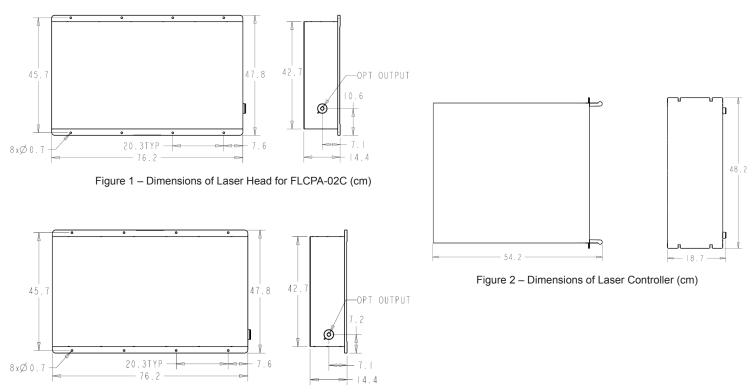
Dimensions of Laser Head for FLCPA-01C (cm)
